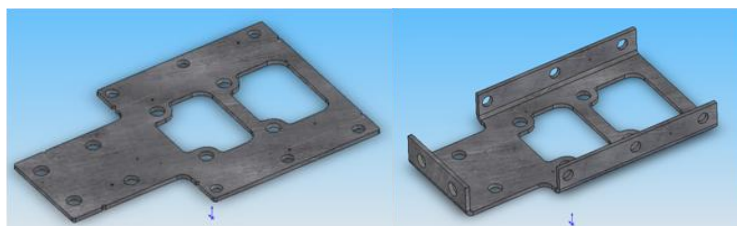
SolidWorks *Folded and Unfolded Sheet Metal Bracket
